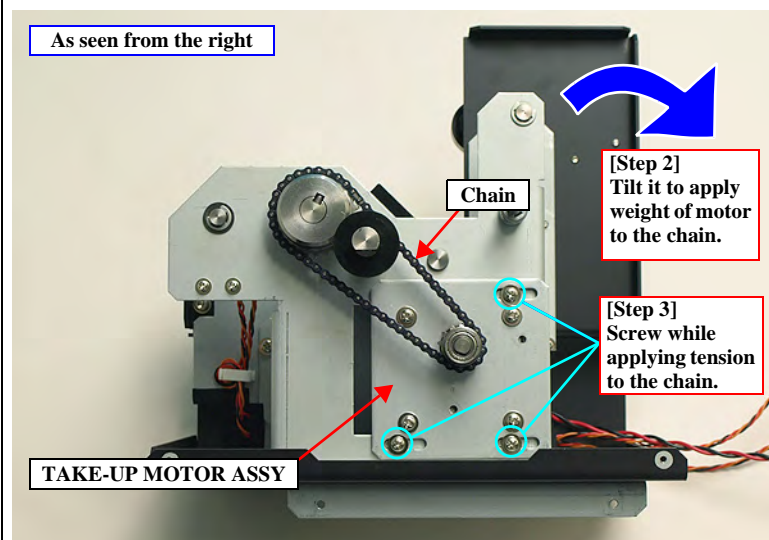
Removing the TAKE-UP MOTOR ASSY
